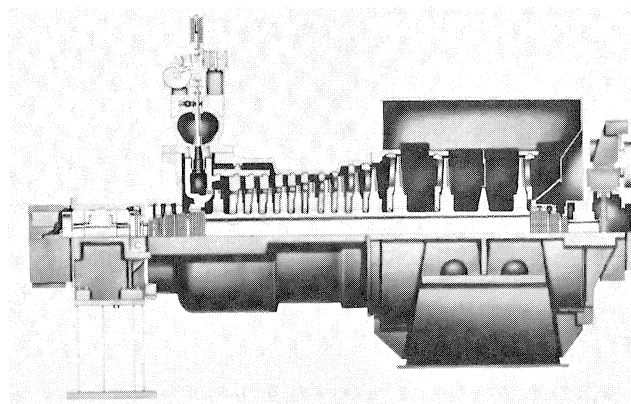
Cross-Section of Typical Medium Speed, High Power Turbine Showing Shaft Diameter, Bearing Span, and Shaft End Overhang Proportions.
